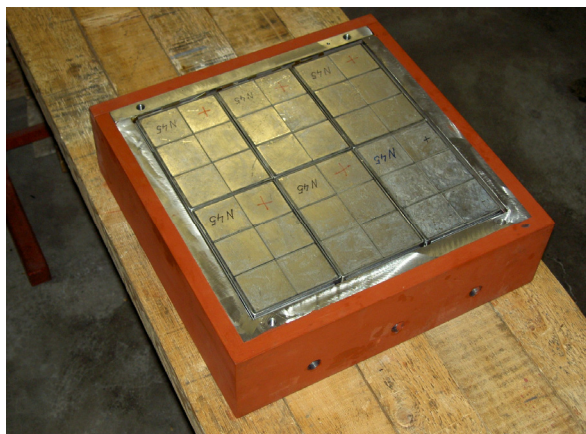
Completely assembled magnetic circuit without the stainless-steel cover sheet.
